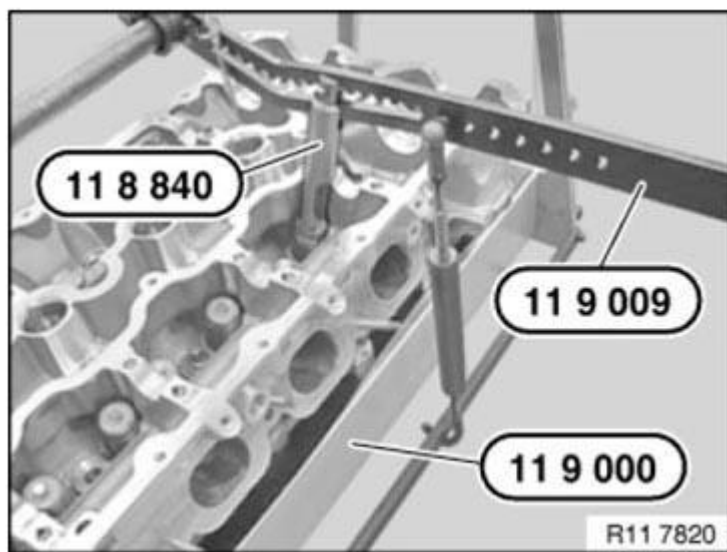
Pressing Down Valve Spring With Special Tool 11 8 840
